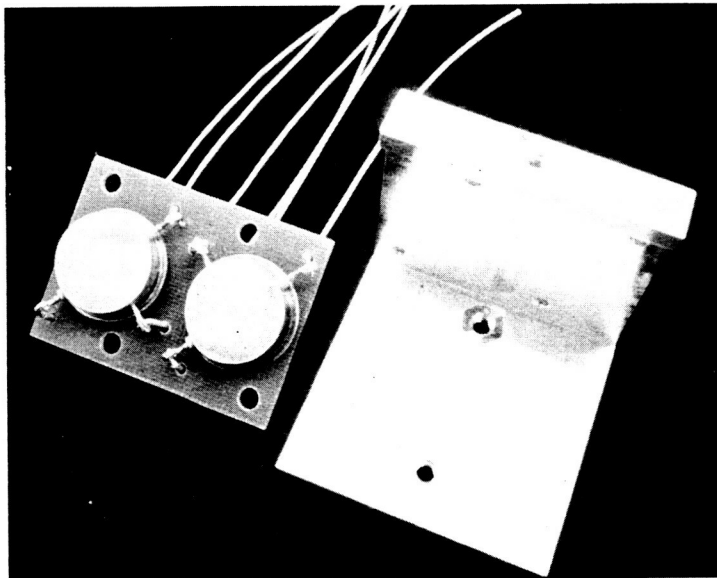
Power Transistor and Heat Sink Assembly, Unassembled
